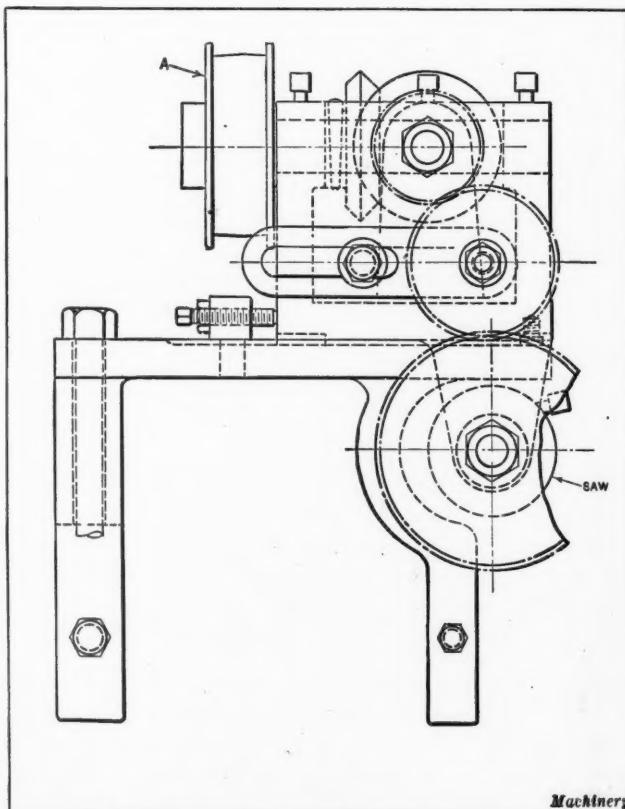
Saw Head for Five-spindle Automatic Screw Machine built by the Davenport Machine Tool Co., Inc.
